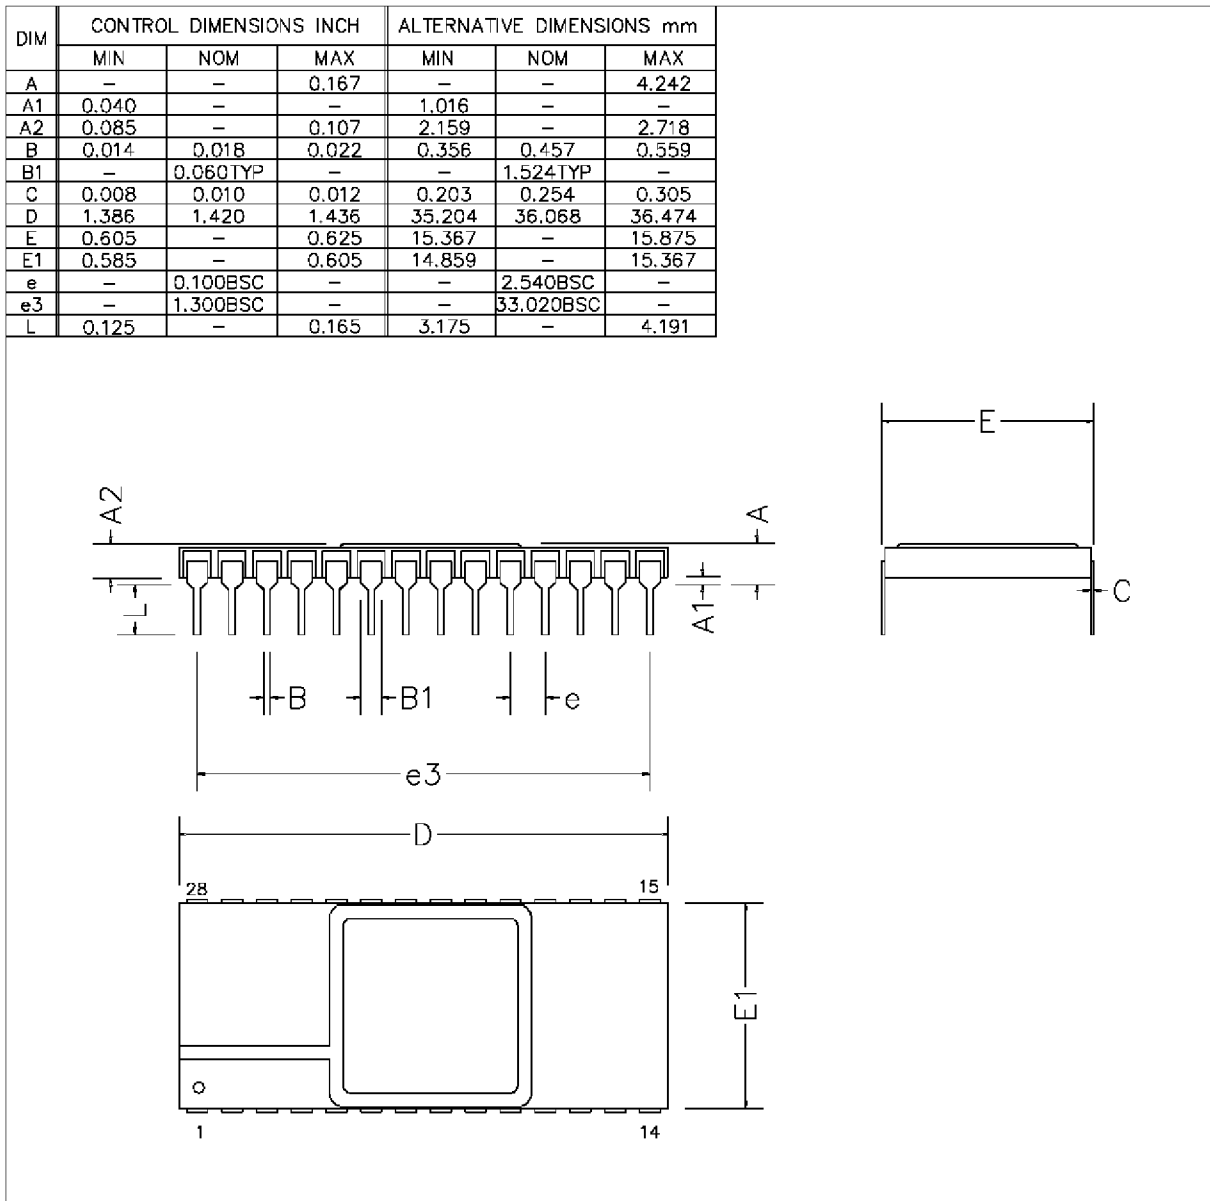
28 pin ceramic dual-in-line package dimensions
